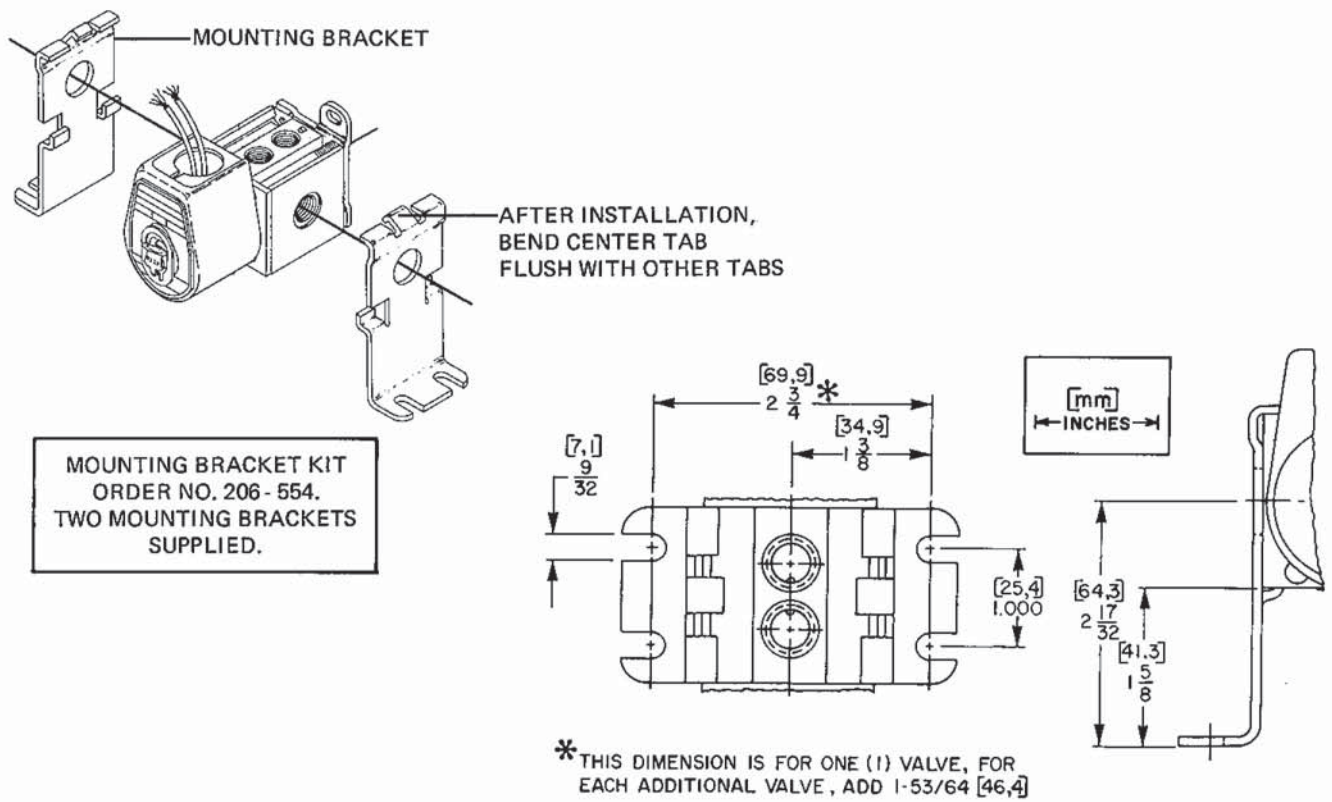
Mounting Brackets (Optional) — Mounting Dimensions Single or Group Mounted Valves — Stand Off Mounting
